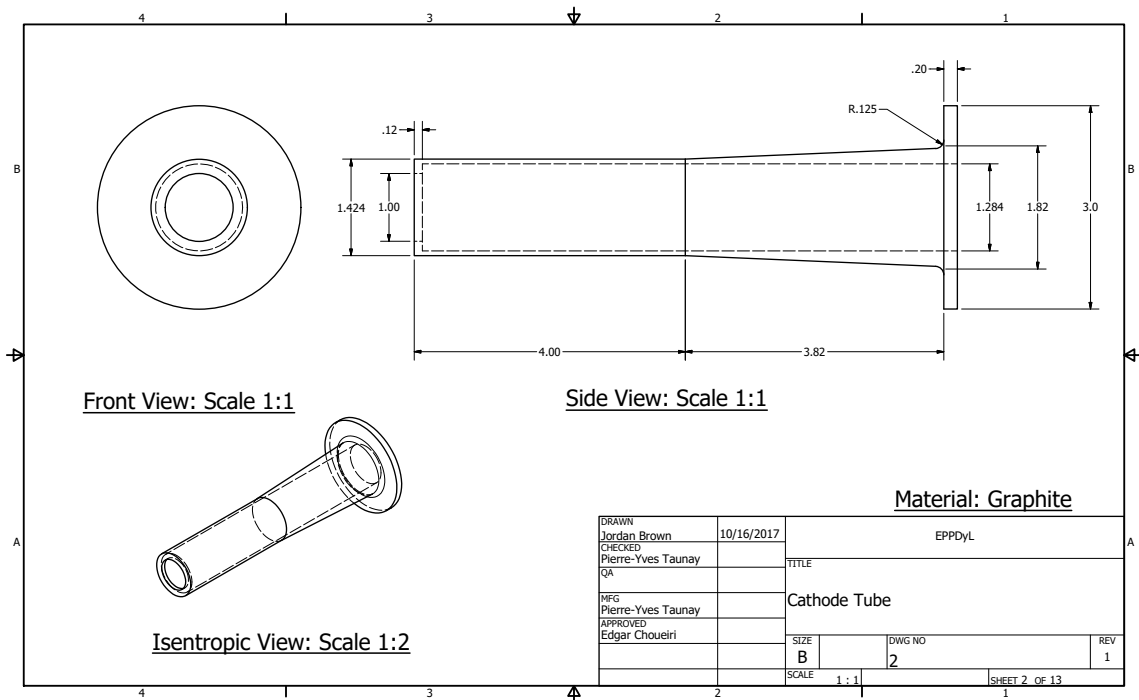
CAD drawing of a Orificed Hollow Cathode
